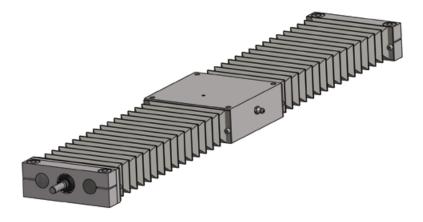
AXLB\_T Ball bushing table with trapezoidal screw drive
